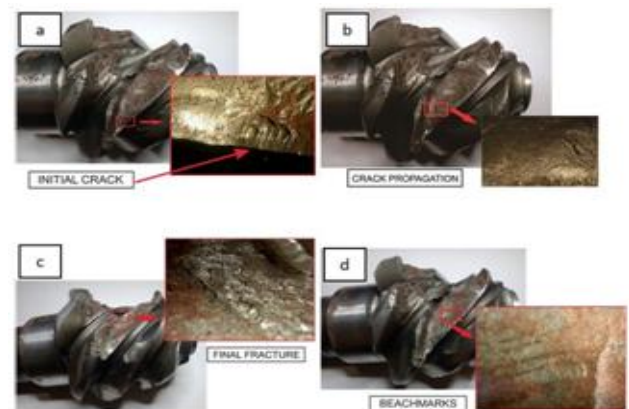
Stereomicroscope on fault area (a) initial crack; (b) crack propagation; (c) final crack; and (d) beachmarks
